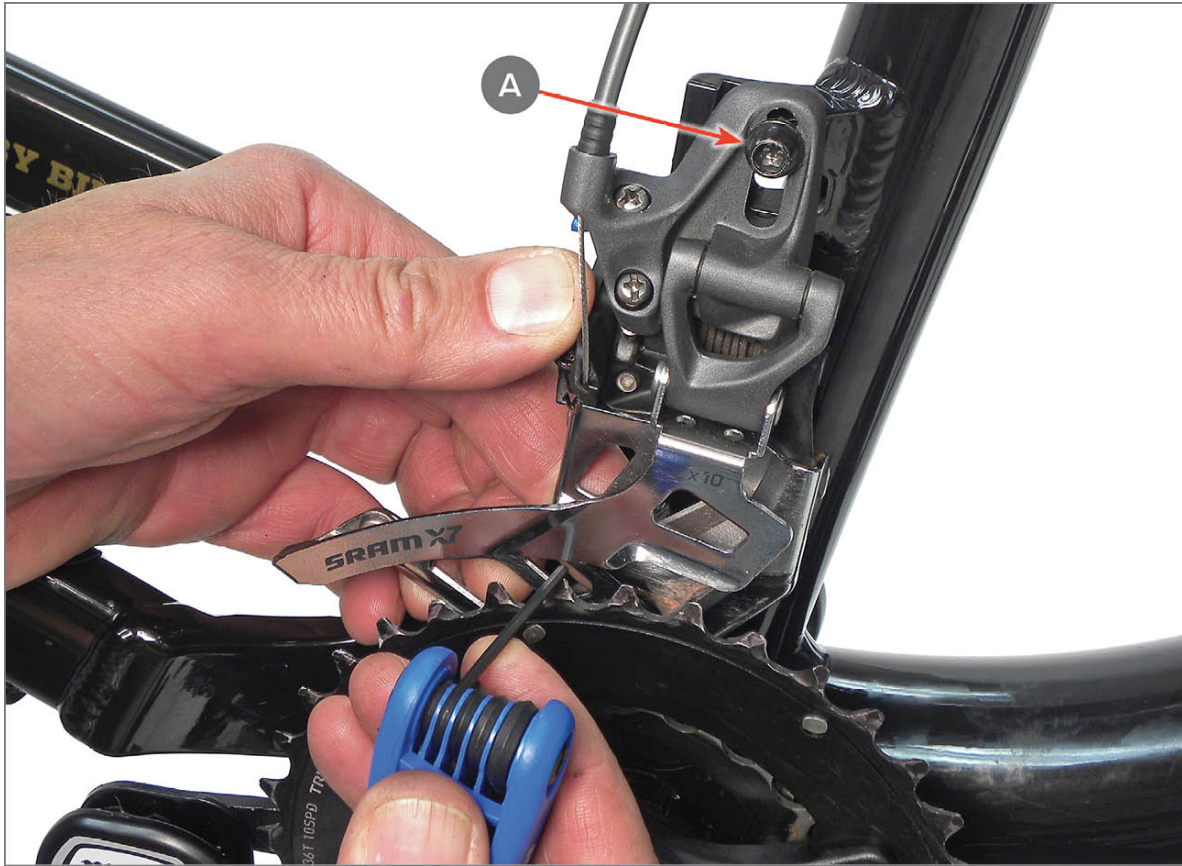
Direct mount derailleur with single bolt (A) for adjusting cage height above rings
